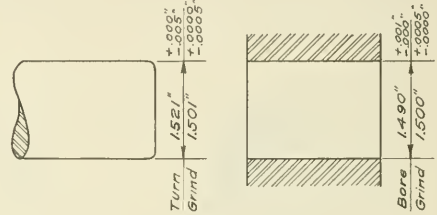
Shaft and Hole 1 1/2 in. Nominal Diameter Dimensioned for Light Driving Fit
